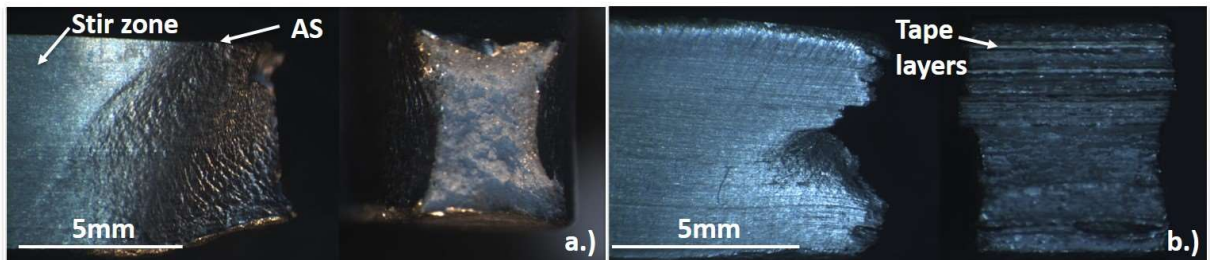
Fracture surfaces from tensile testing of transverse section of welded 6061 materials. a.) Rolled b.) UAM
